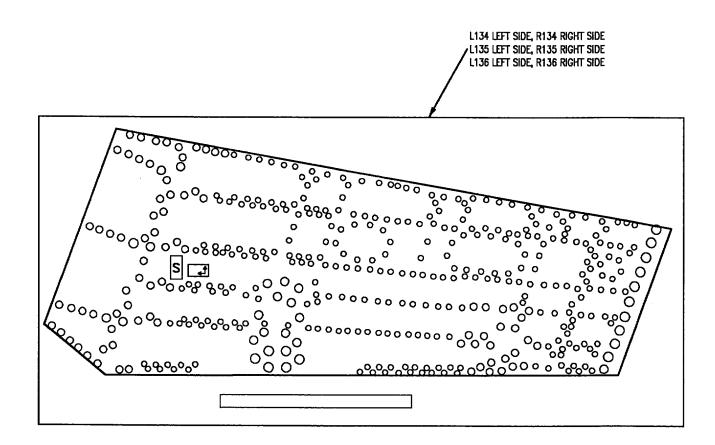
Drilling Holes in Skins or Substructure (Sheet 12)
